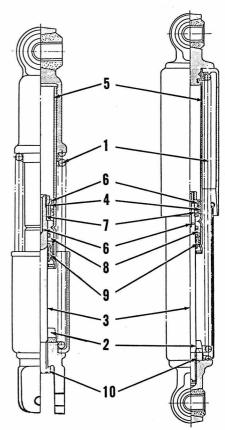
Cross sectional view of unitized suspension units. Unit on left is used on front of M15 and M31, unit on right is typical of all rear units.
